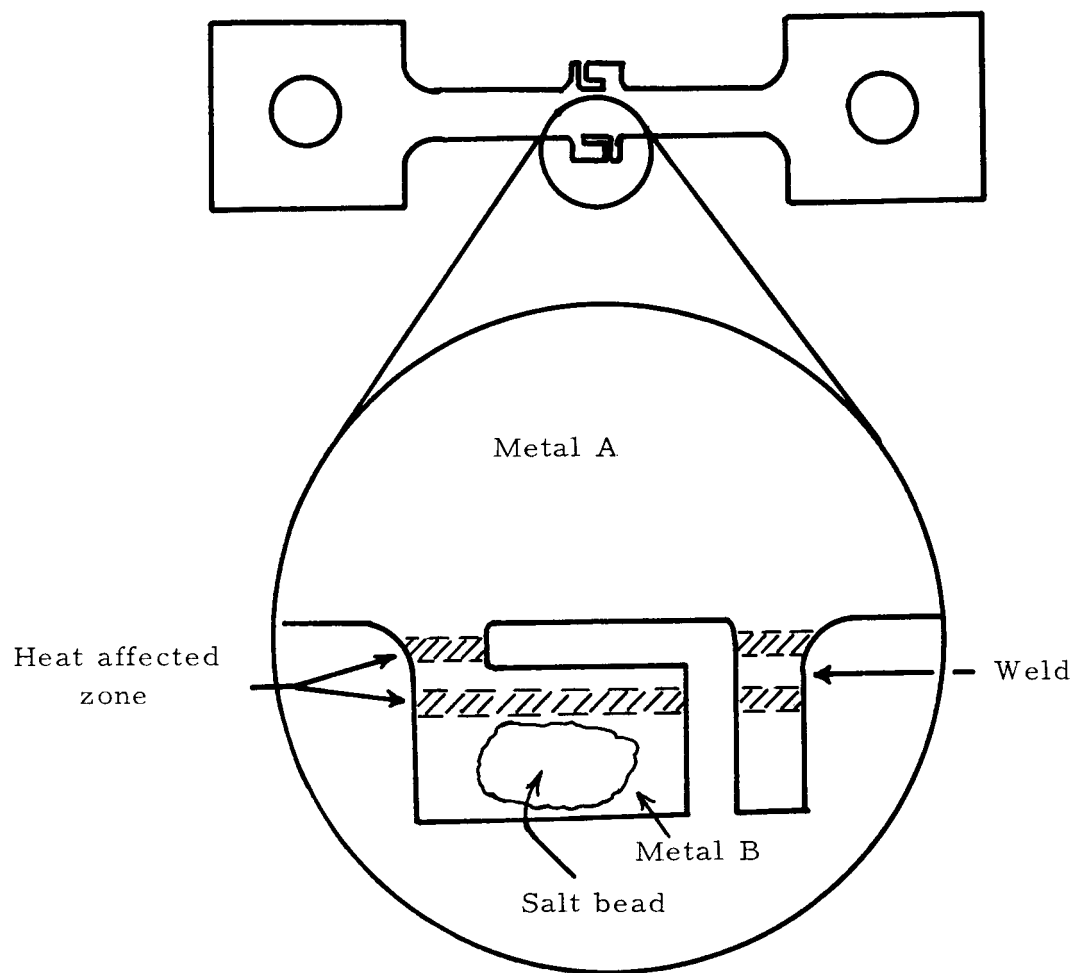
TENSILE SPECIMEN WITH WELDED SIDE HOOKS.
